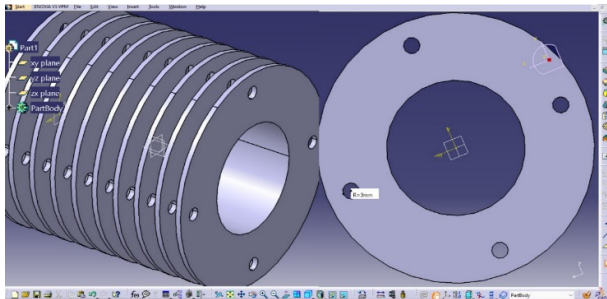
Geometric dimension of the cylindrical block having circular fins with 5 mm circular hole
